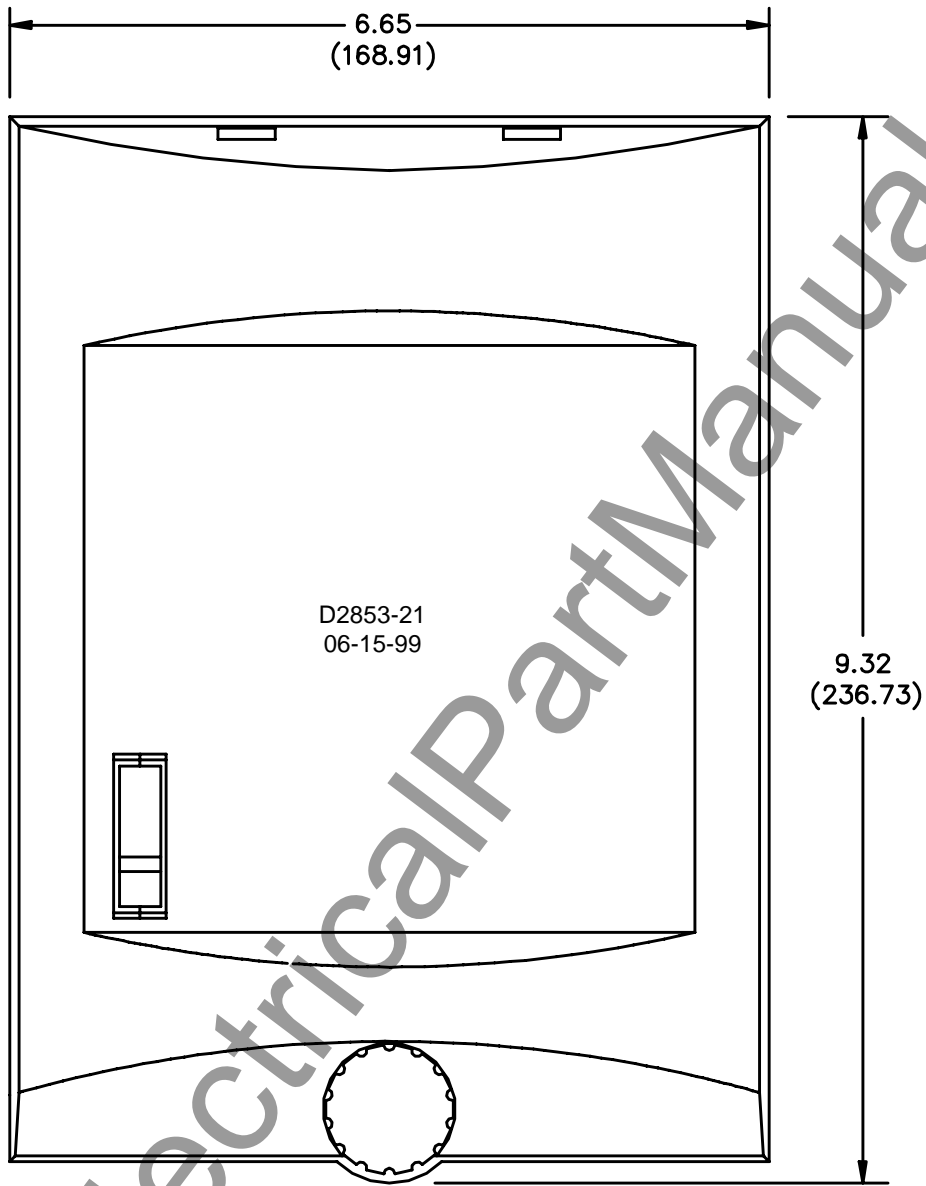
S1 Case (Cover) Dimensions, Front View
